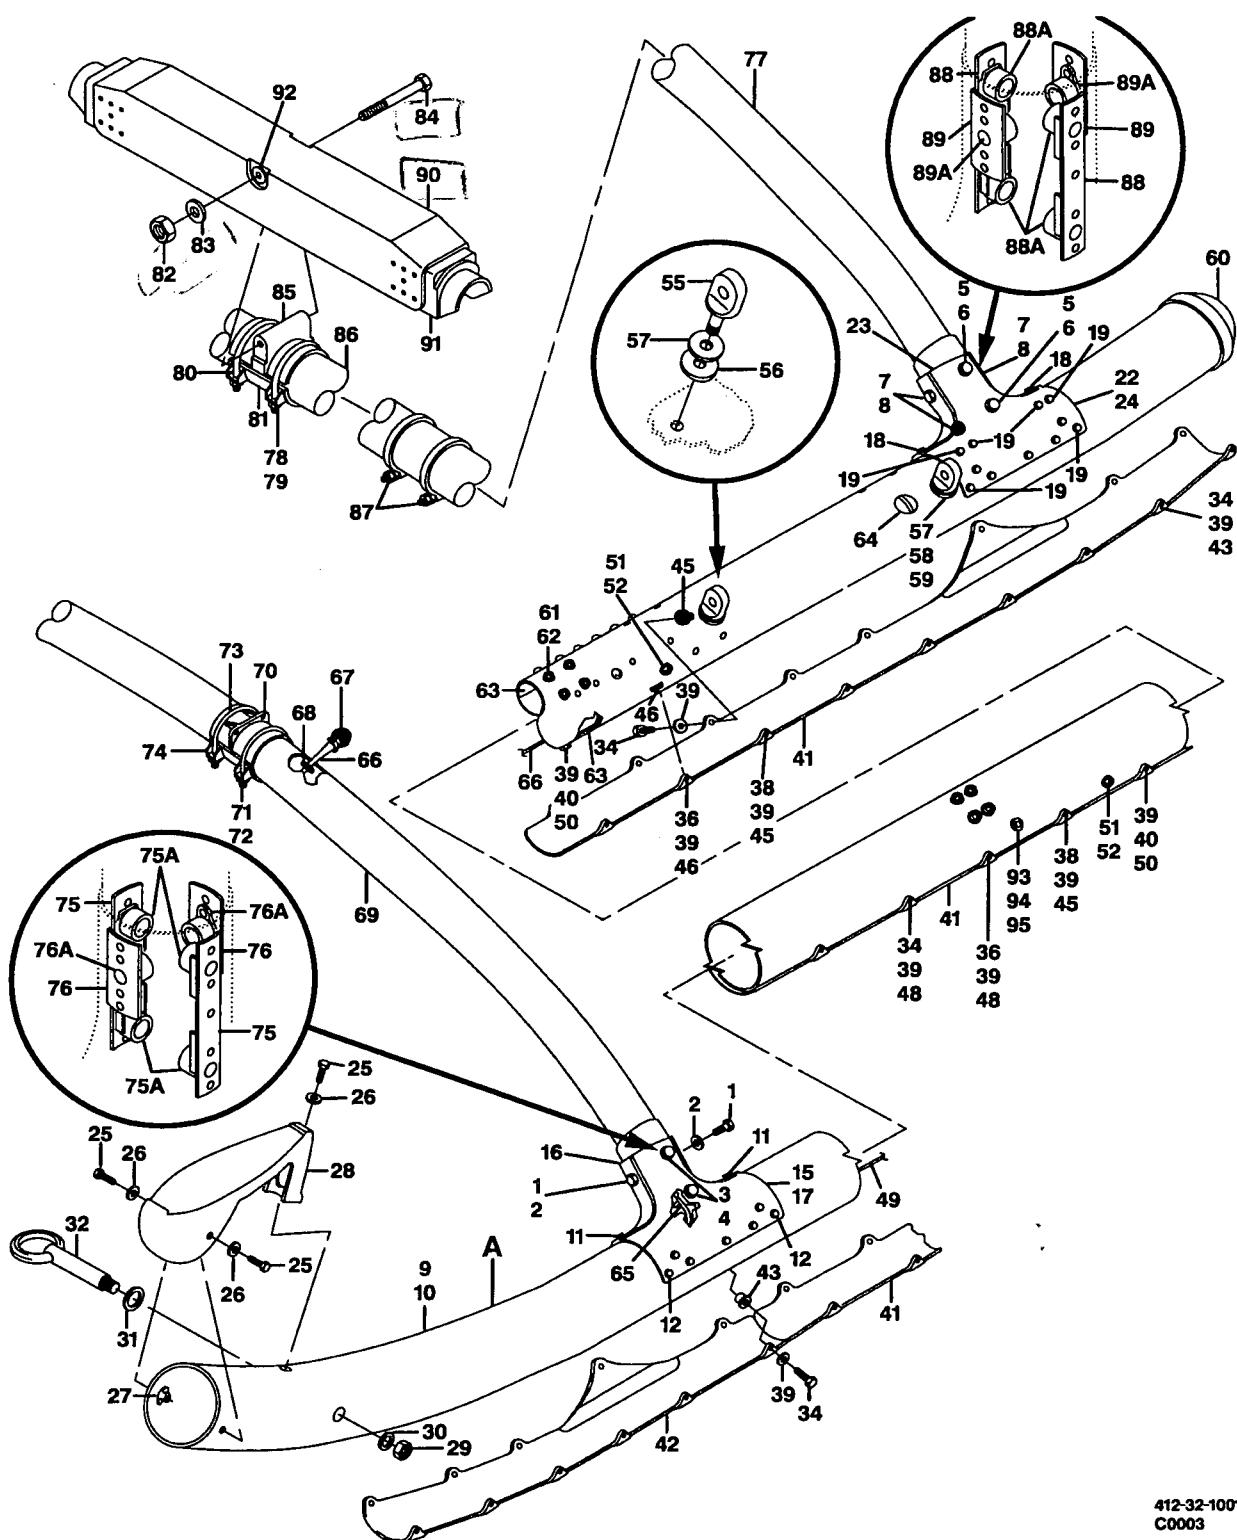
Standard skid gear kit (Sheet 1 of 2)
